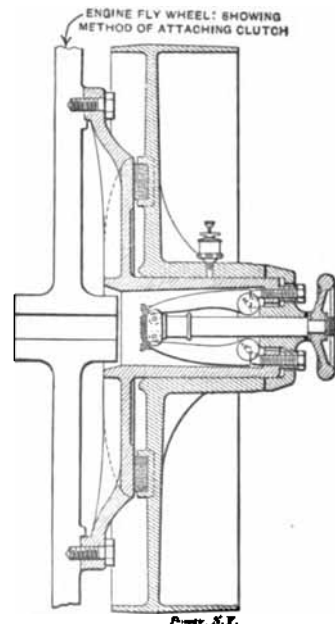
shows the front view of the "B. & C." clutch, while the application of the clutch is shown in Figure 2. This view also gives a good idea of the construction of the clutch, which consists of three main parts: the pulley, the carrier, which is bolted to the arms of the engine flywheel and acts as a journal for the pulley, and the gripping mechanism, which consists of a gripping plate, spindle and cam levers. The clutch has a side grip, which eliminates the effect of centrifugal force and insures a positive release.
